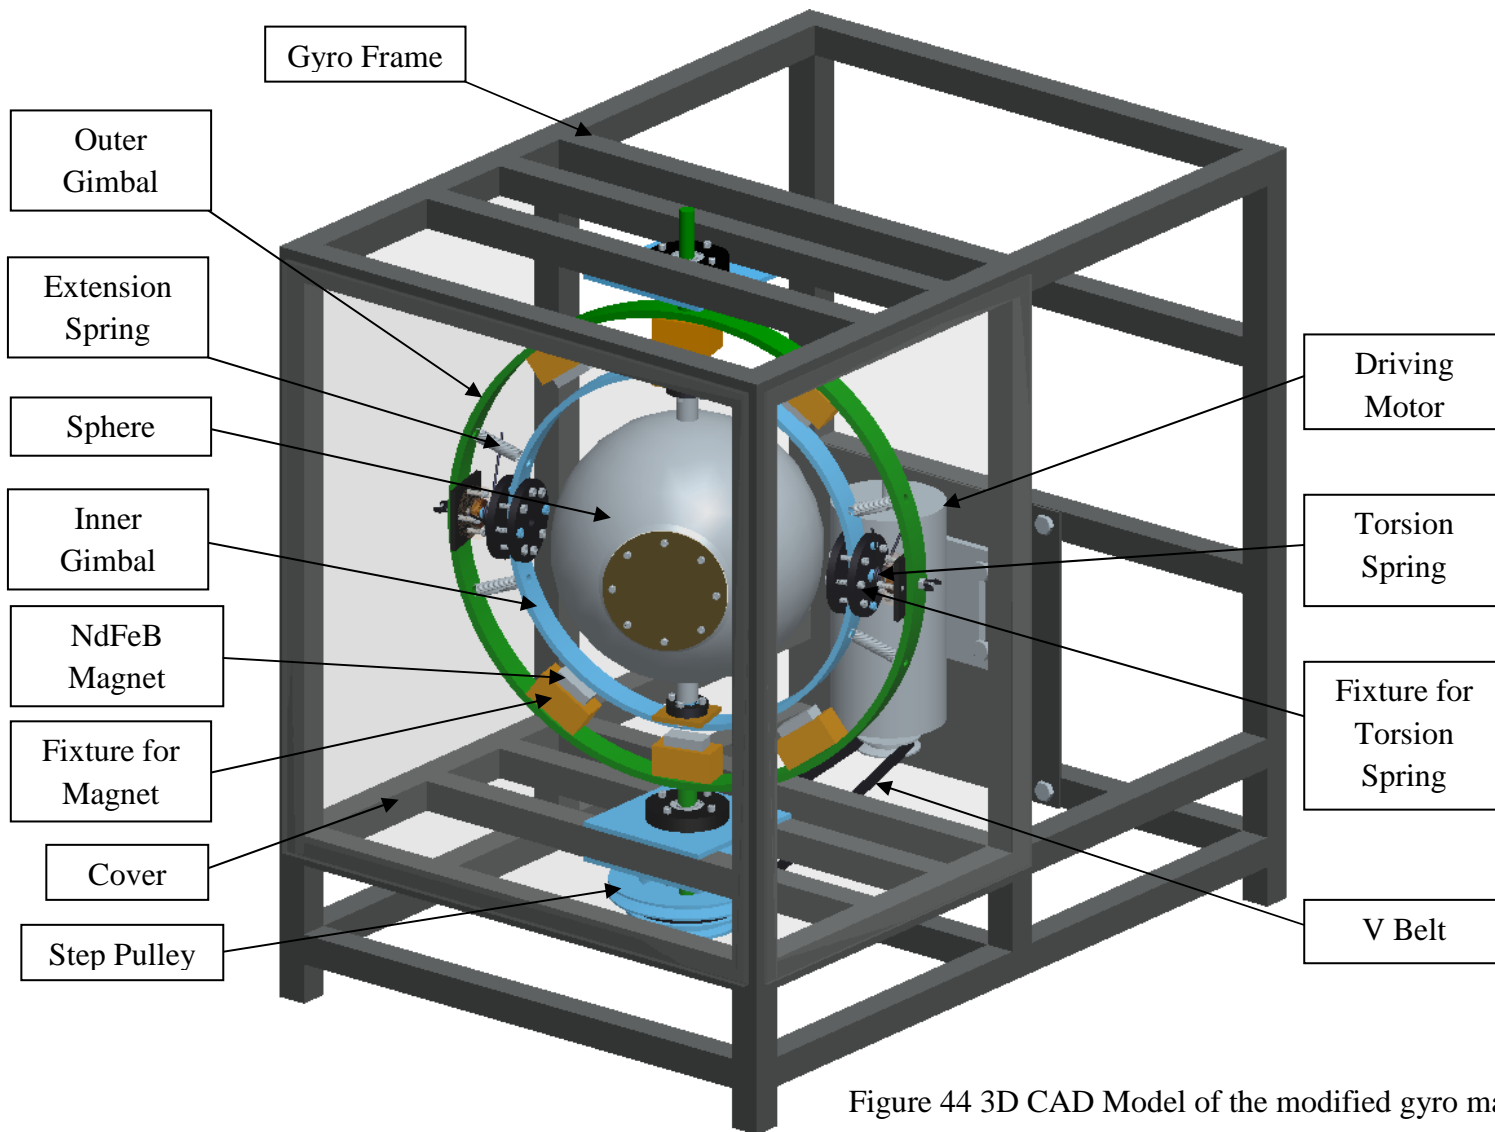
3D CAD Model of the modified gyro machine showing different components of the machine
